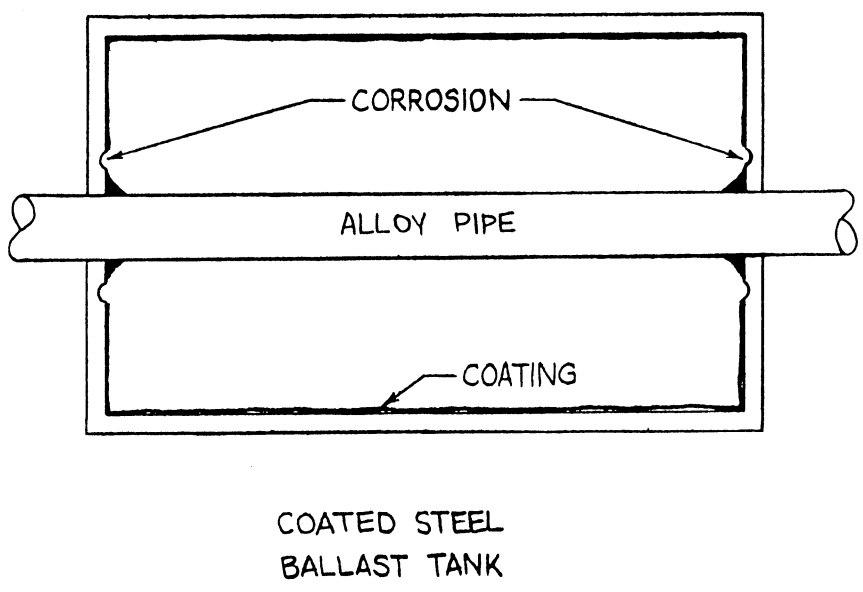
Corrosion of steel bulkhead adjacent to alloy pipe to bulkhead weld
